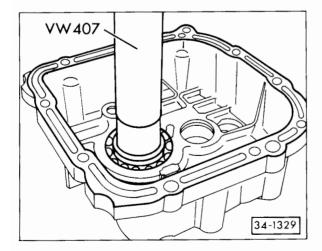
Pressing deep-groove ball bearing out of bearing carrier
